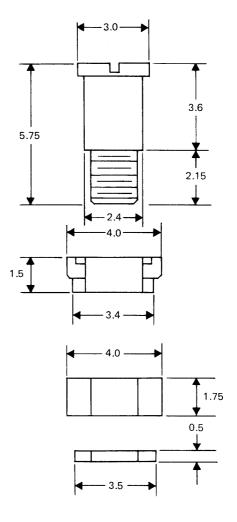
Washer, Cam Roller B, Cam Roller A, and Shaft Screw (Ref. 10, 45, 46, and 47; Figure 4-15).
